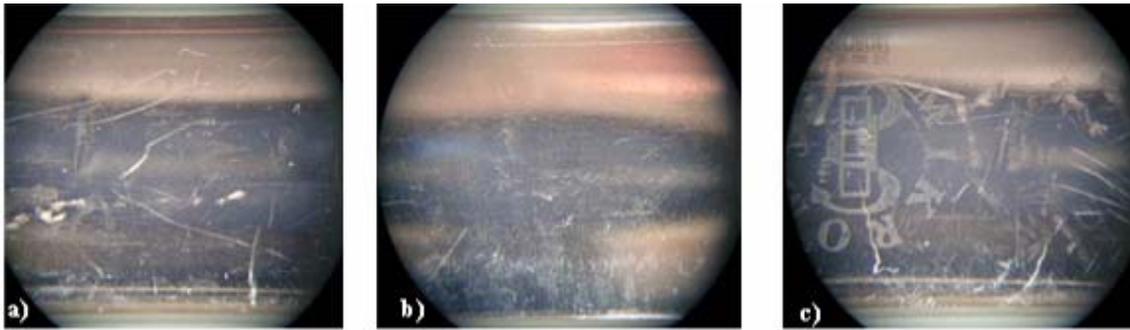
Plate with the surface damage (26 month): a) end side 1, b) middle, c) end side 2
